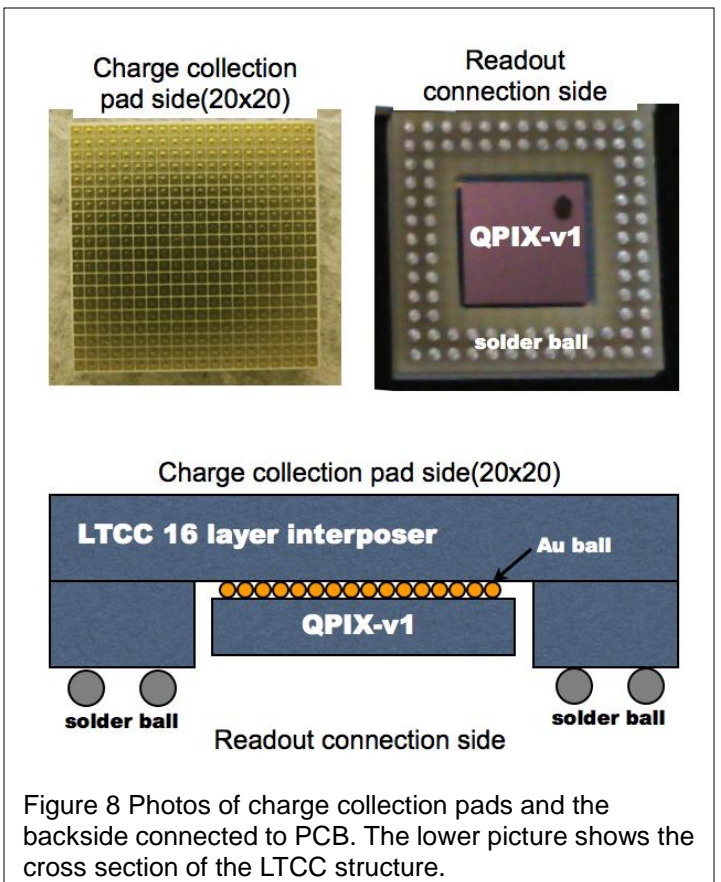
Photos of charge collection pads and the backside connected to PCB. The lower picture shows the cross section of the LTCC structure.
